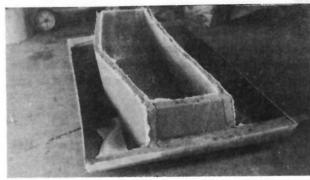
Tank walls with Dynel inside, outside but not on ends.
